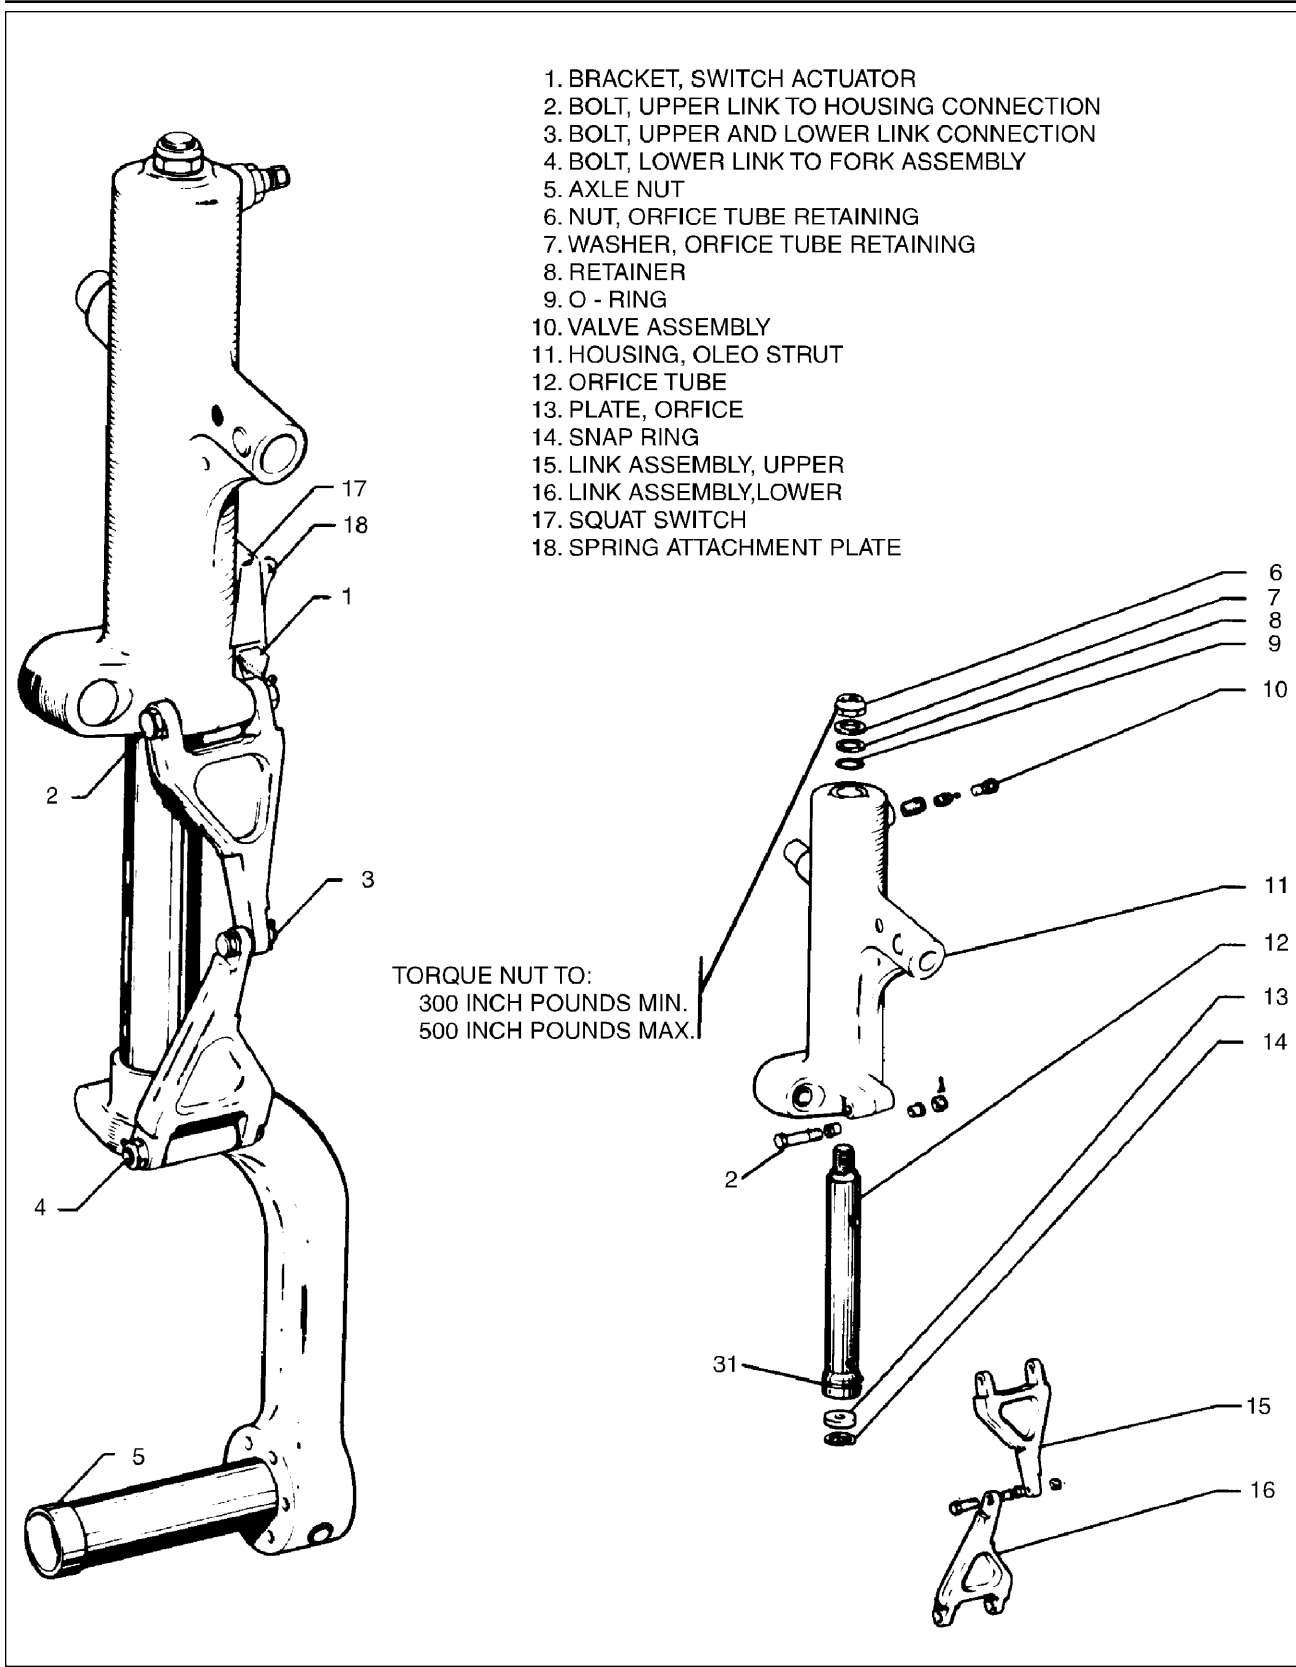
Main Gear Oleo Strut Assembly (Sheet 1 of 2)
